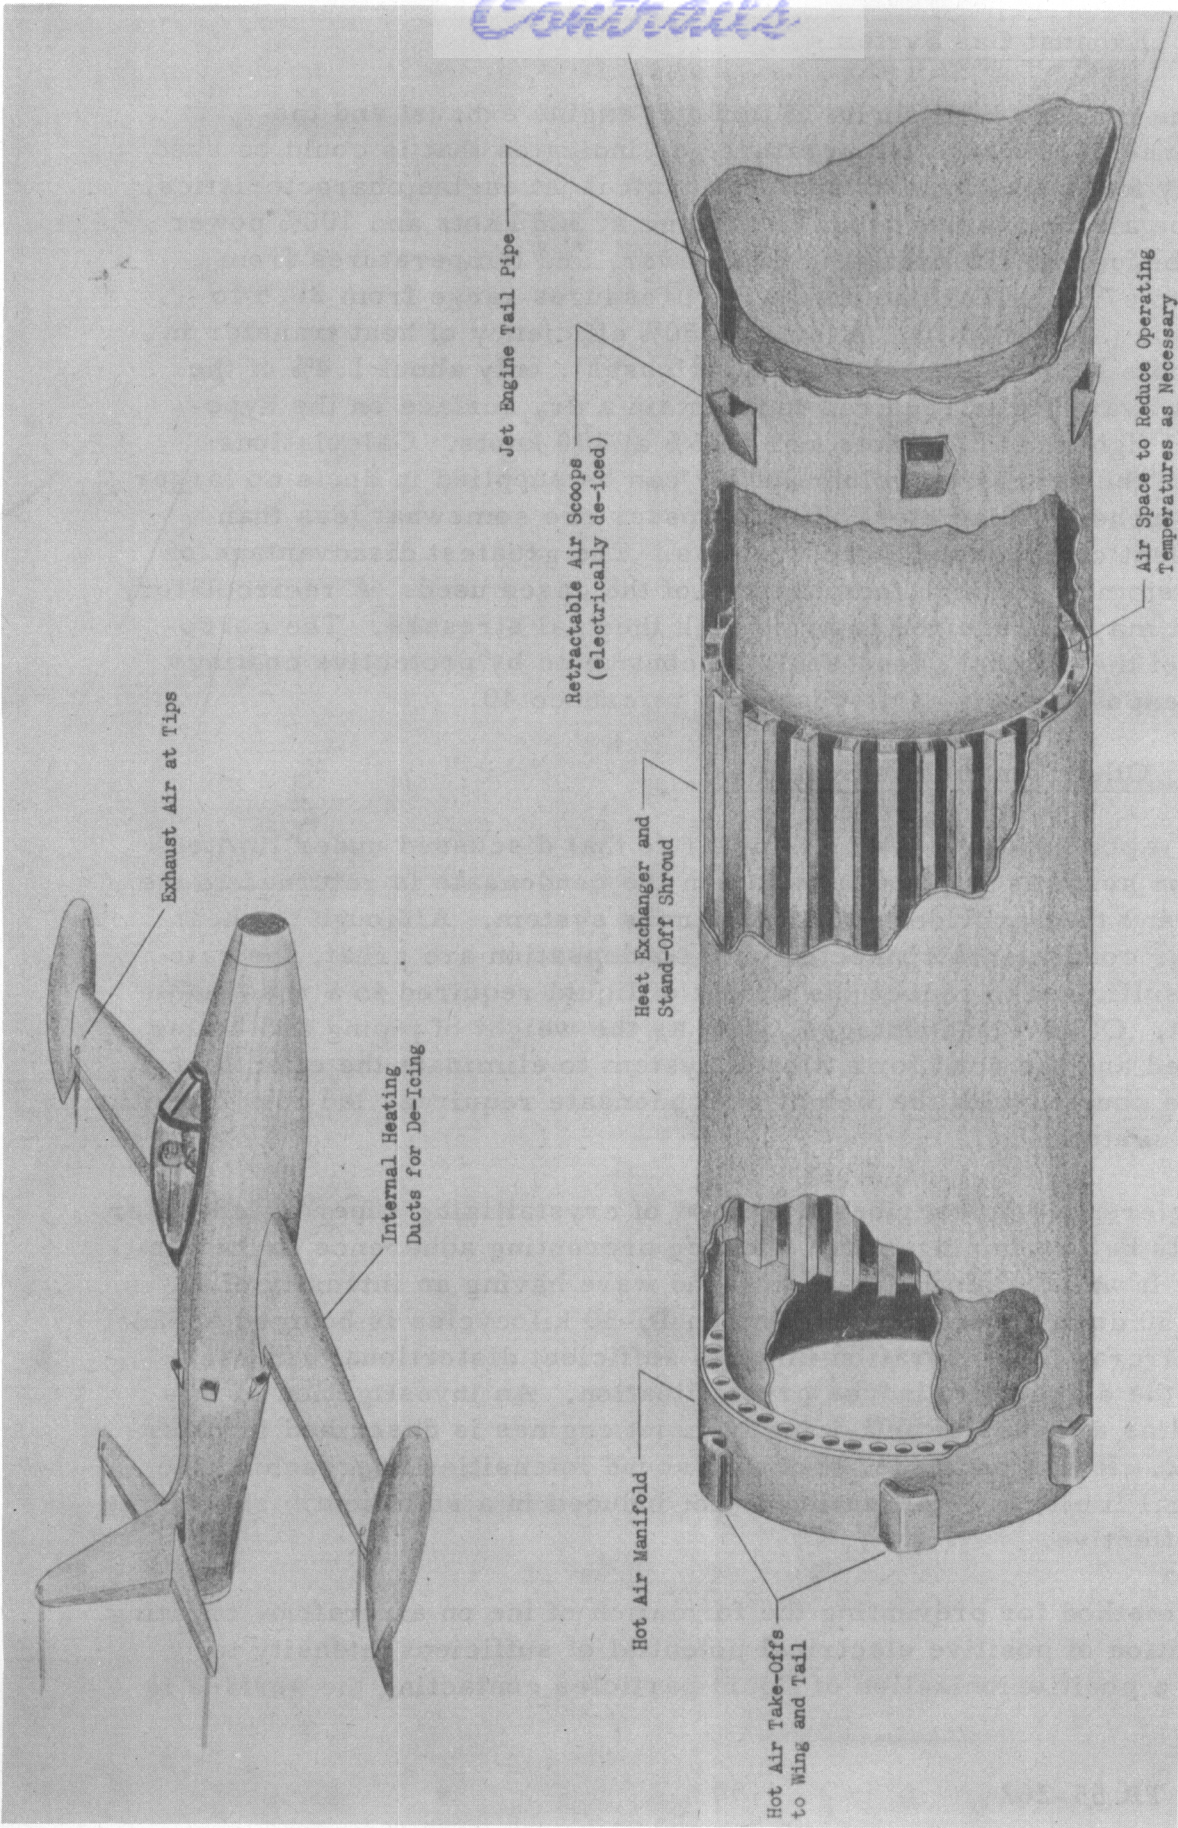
CONTINUOUS TYPE DE-ICING SYSTEM EMPLOYING JET ENGINE TAIL PIPE HEAT EXCHANGER
